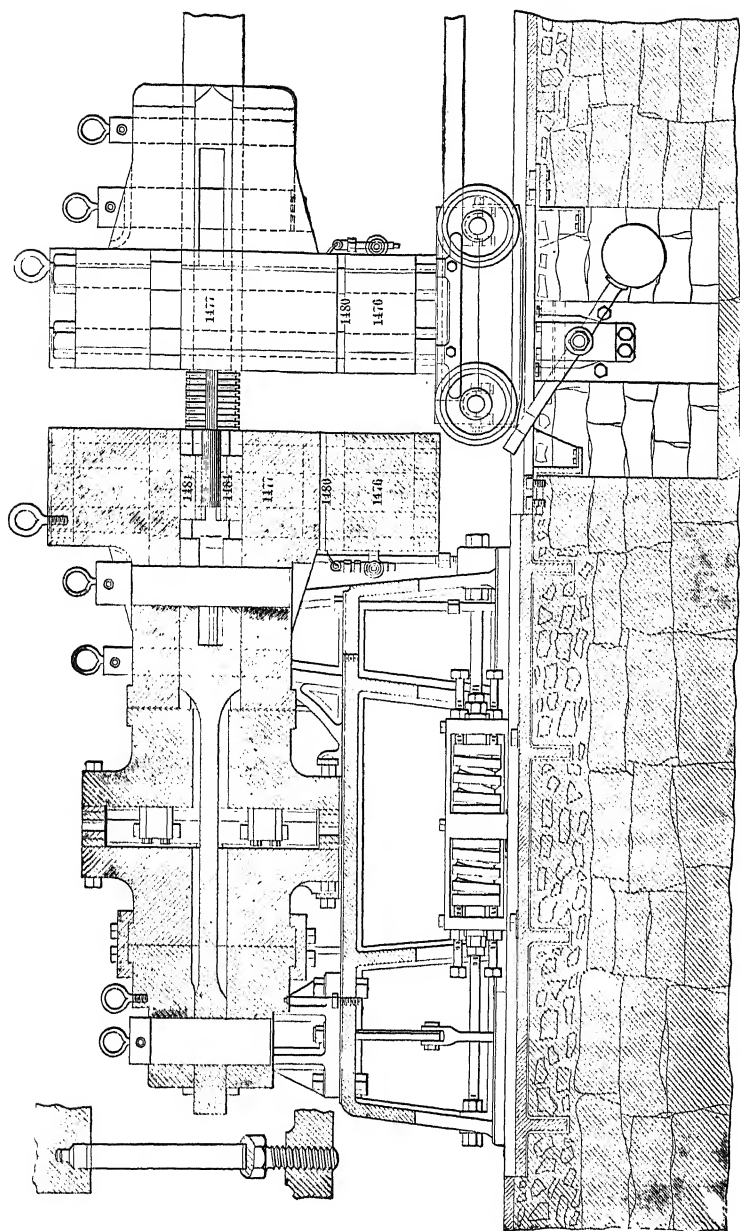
LONGITUDINAL SECTION OF WEIGHING HEAD, EMERY TESTING MACHINE.
